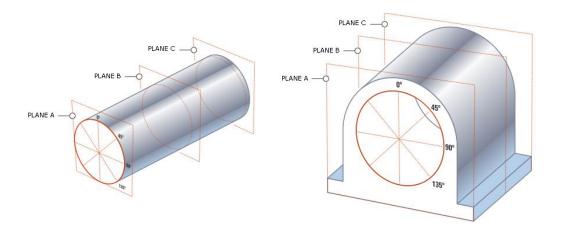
DIAMETER MEASUREMENT OF HOUSING
